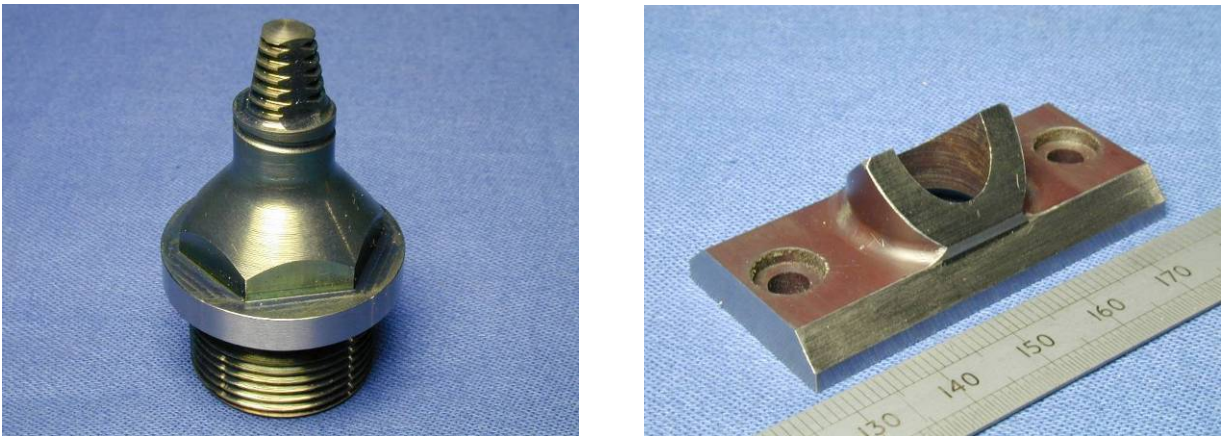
Stronger Tool and Shoulder, as designed by TWI under this CRAD.
